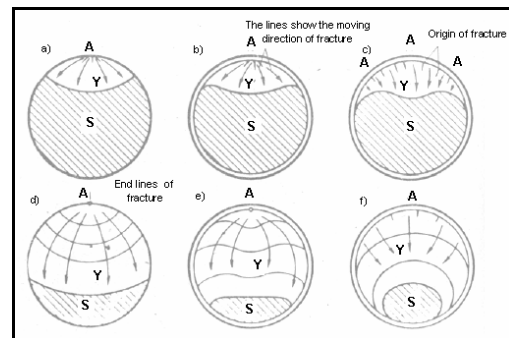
A-Fracture origins, Y-Fatigue fracture, S-Final fracture surface [19].
